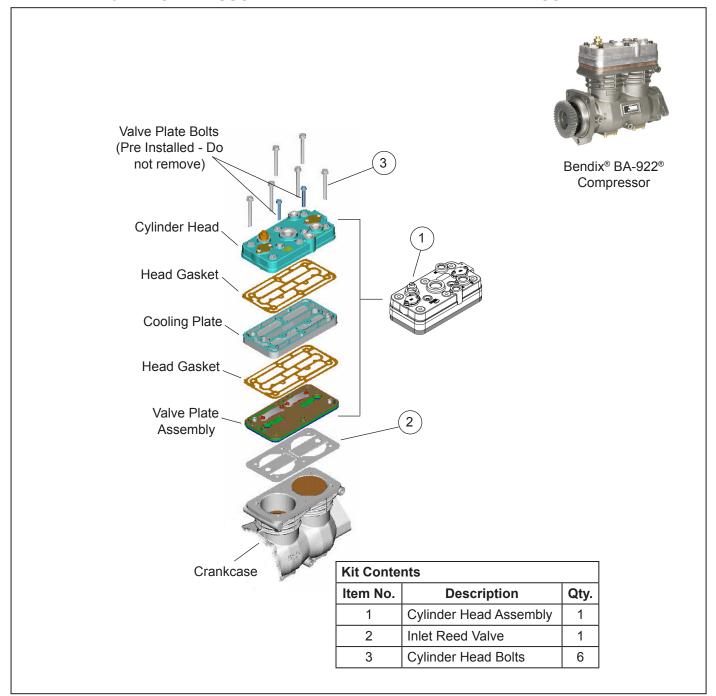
Bendix® BA-922® Compressor Cylinder Head Kit
